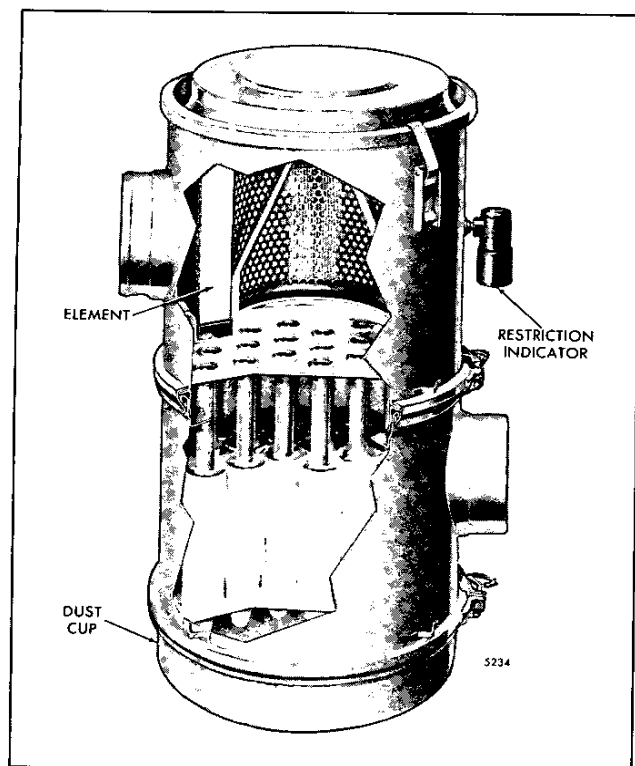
Dry Type Air Cleaner (Extra Heavy Duty)
